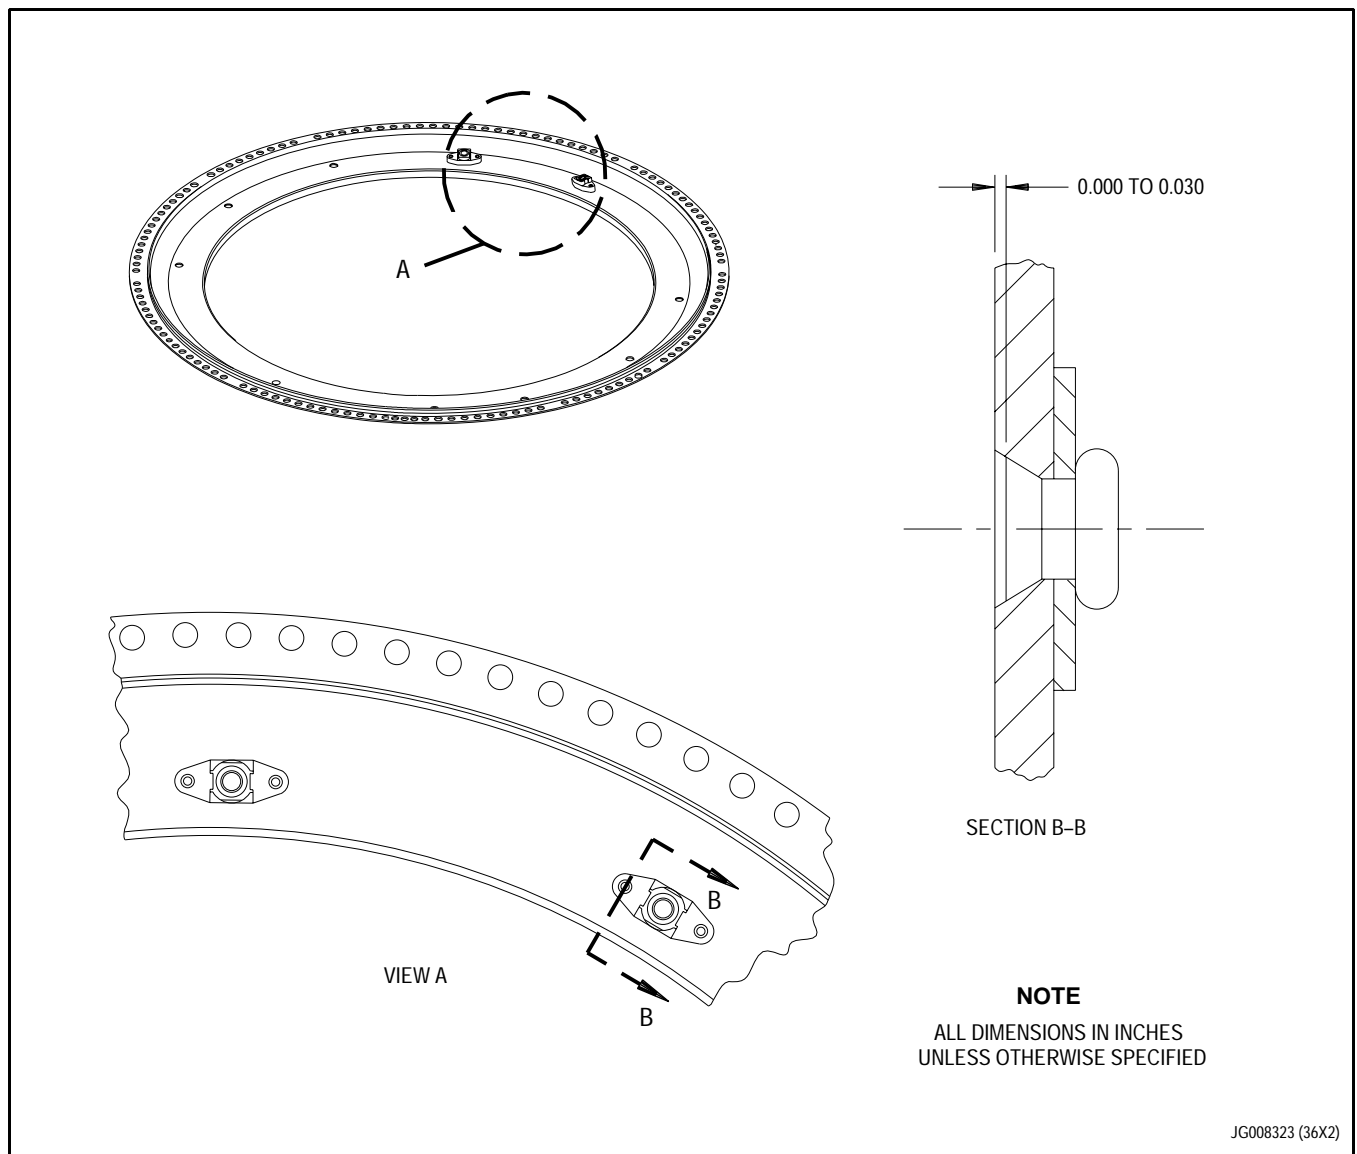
Compressor Stator Support Assembly - Plate Nut Replacement
